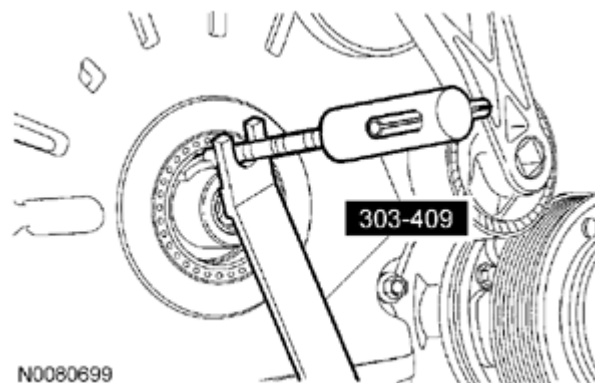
Removing Crankshaft Front Seal Using Oil Seal Remover
